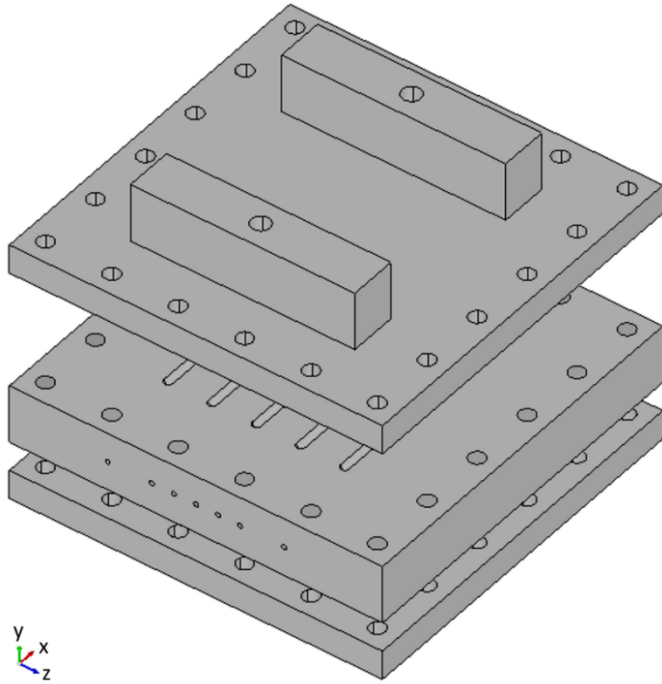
Drawing of core CFHE assembly: top, process fluid manifold plate; middle, heat exchanger plate; and bottom, utility fluid manifold plate.
